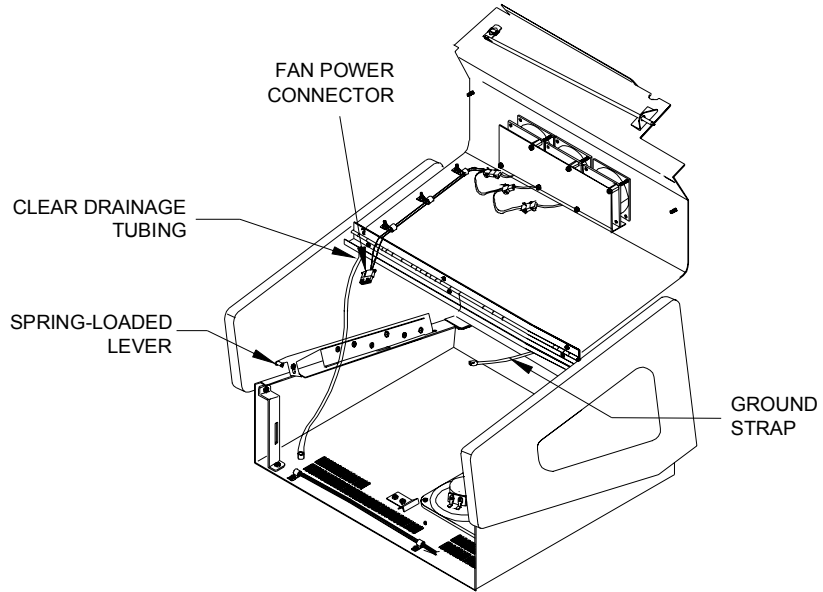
INTERNAL VIEW WITH MONITOR ASSEMBLY REMOVED
